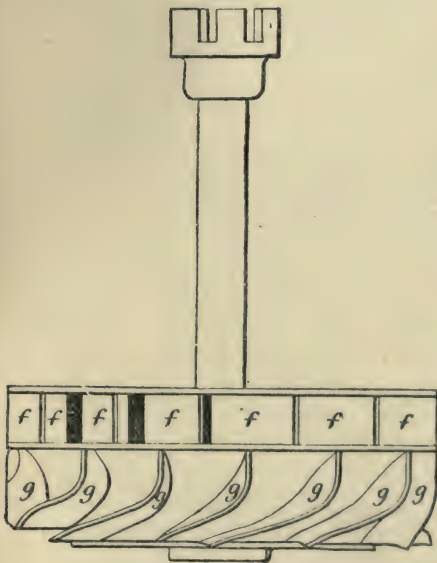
is a vertical section through the same; Fig. 7240 an elevation of wheel removed from casing; Fig. 7241 a plan showing direction of buckets, and also the guides and guide-rods; and Fig. 7242 a view of a cast-iron flume or casing. In these figures, *a* is the outer casing to which are fixed the guides *b*; *c* are the rods for regulating the opening of the guides. These rods are attached at the centre to the arm *d*, which at its outer end consists of a segment of a toothed wheel, into which is geared the pinion *e*, from which pinion a rod passes upwards to any convenient position. By these means, the guides may be easily regulated to any desired opening. *f* denotes the upper buckets, having a horizontal discharge, and *g* the lower buckets, from which the discharge is vertical. The sphe.
